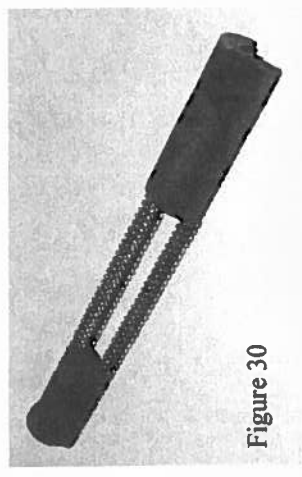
thru 30 highlight the re-assembly of the BOLT & GUIDE ROD ASSEMBLY. Figure 30 shows the finished assembly ready for installation in the carbine's upper receiver.
